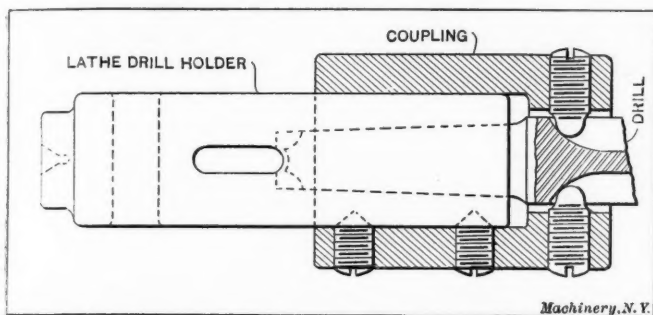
Drill Coupling which may be used when both Tang and Slot are worn out
